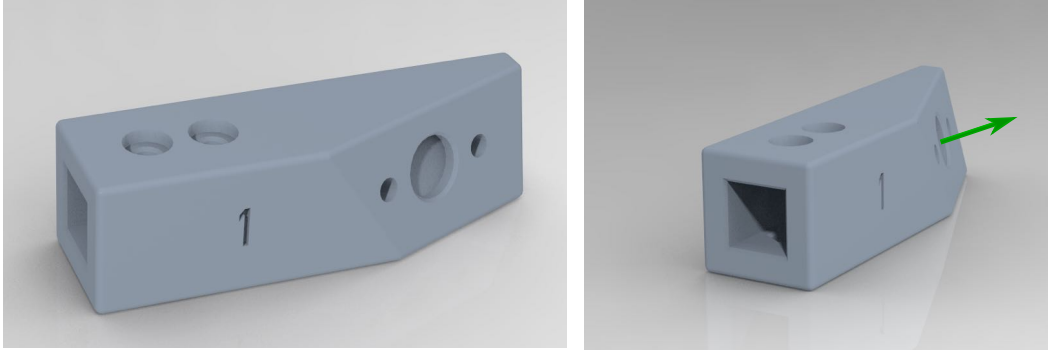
CAD design of the motor adapter for the O_+^7 prototype motor # 1. The adapter is designed to fasten the motor to the body frame at position ${}^B\mathbf{p}_1$ and orientation \mathbf{v}_1 in \mathcal{B} .
